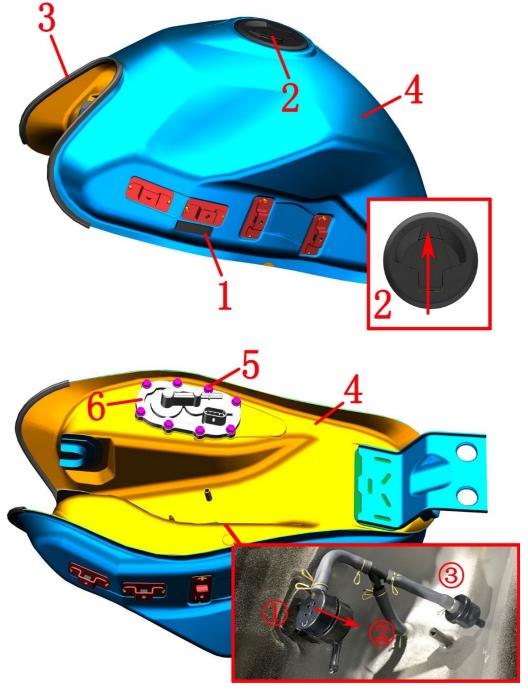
FUEL TANK COMPONENT		Fuel tank component	CHK	40)
